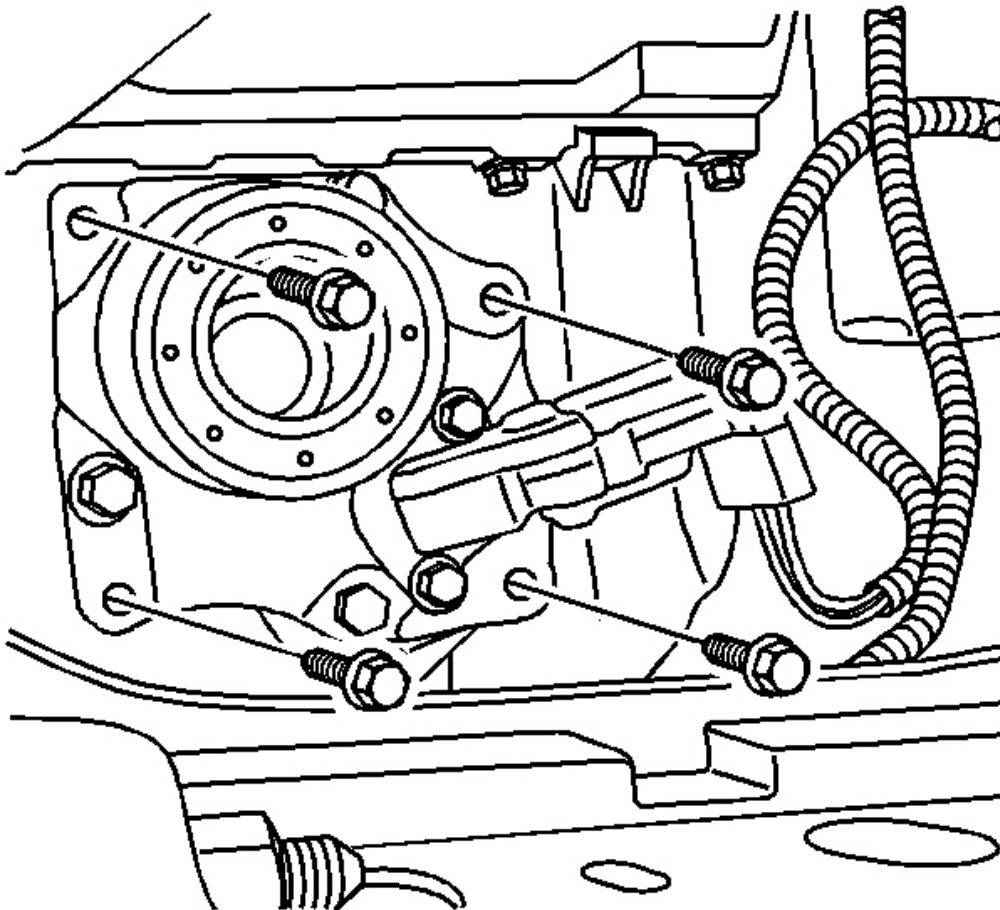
View Of Intermediate Shaft Bearing Assembly Mounting Bolts
